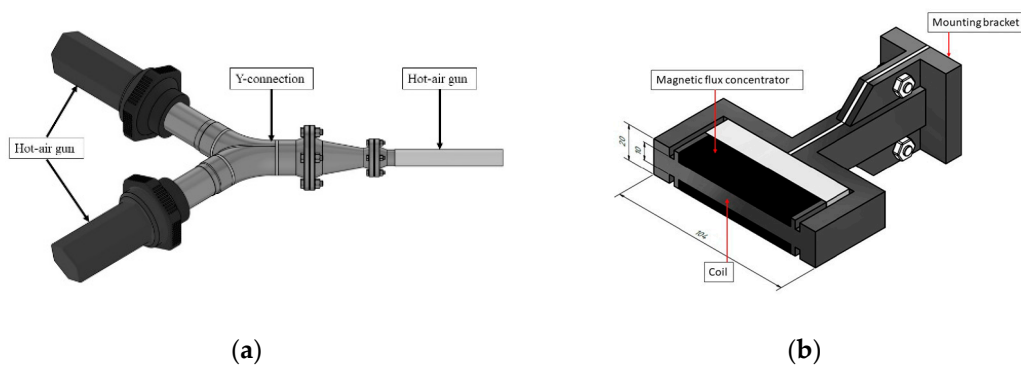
(a) Left Y-connection test bed; (b) right inductor coil geometry.
